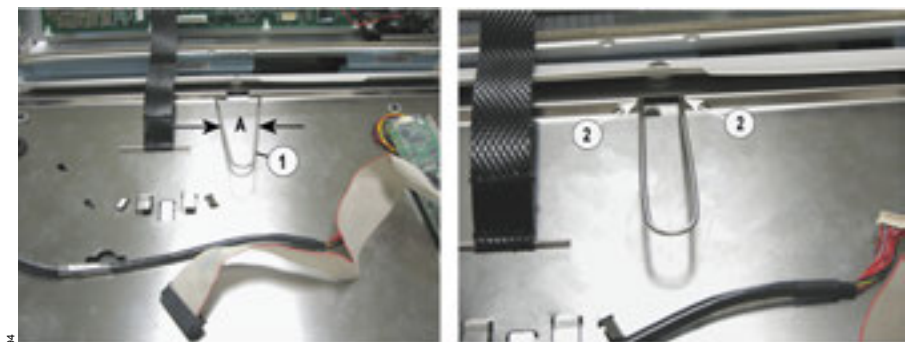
Detail view of operator control unit: Locking spring (unlock position)
